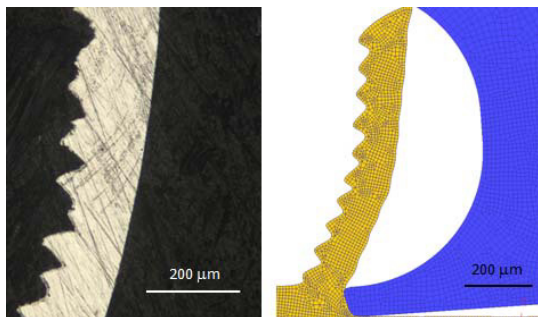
Chip geometry obtained during machining of Inconel 718 alloy (43.5 HRC) at 70 m/min and 0.1 mm/rev: (b) experimental; (c) numerical.
